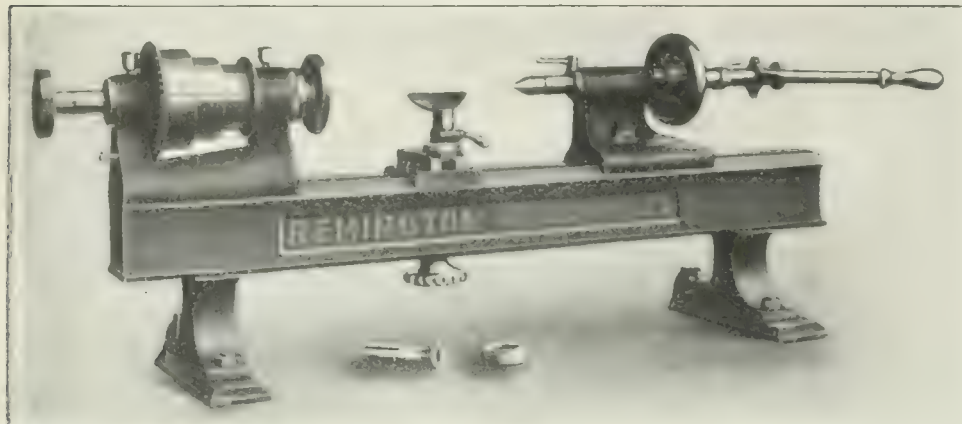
Bench Lathe with Combination Screw Feed and Lever Feed Tailstock Made by the Remington Tool & Machine Company, Boston, Mass.
